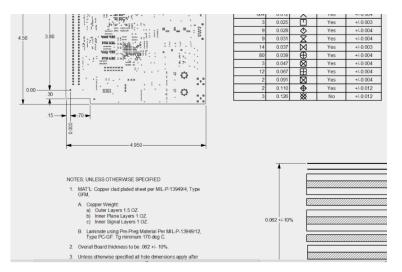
Drawing-detail wizards automate the layer stack-up, finger chamfer, and V-score drawing
